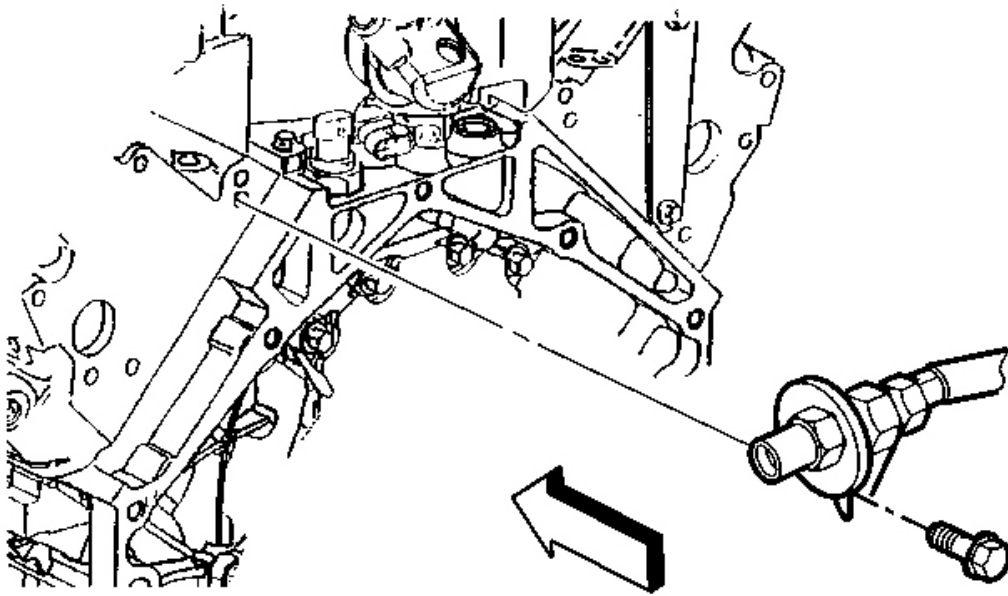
RH Air Injection Check Valve To RH/LH Cylinder Head & Bolts
